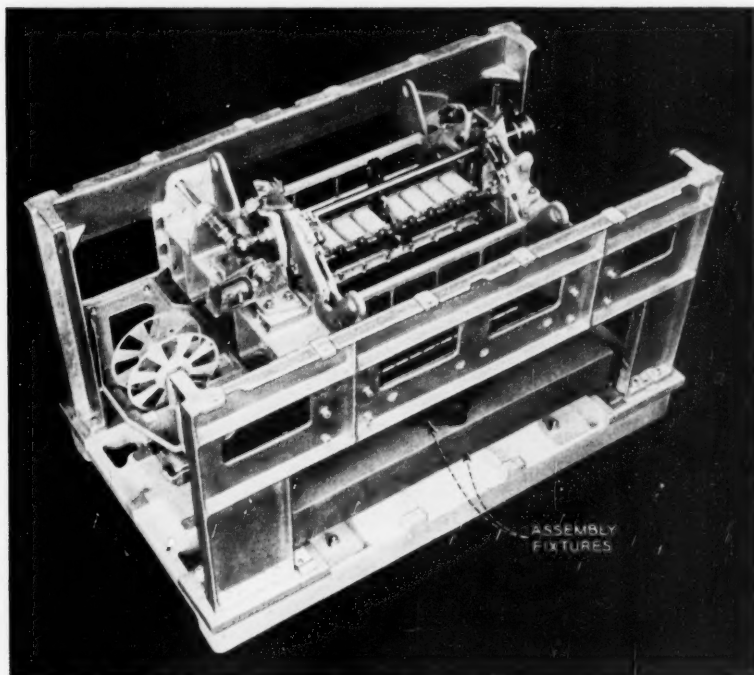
Base and plug assembly fixture, card cage and frames.
